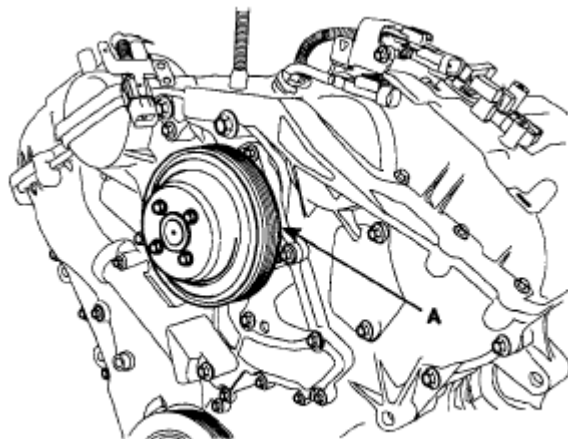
Identifying Water Pump And Gasket With Bolts
